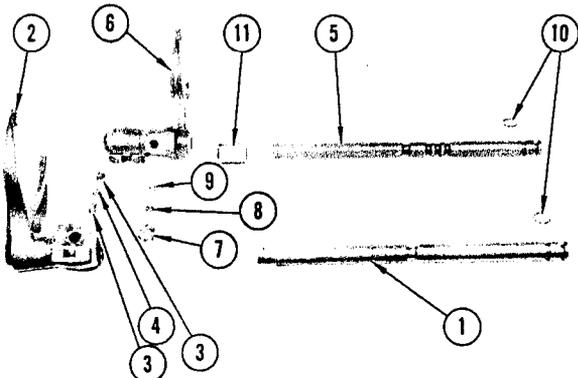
EXPLODED VIEW OF SHIFTER MECHANISM
